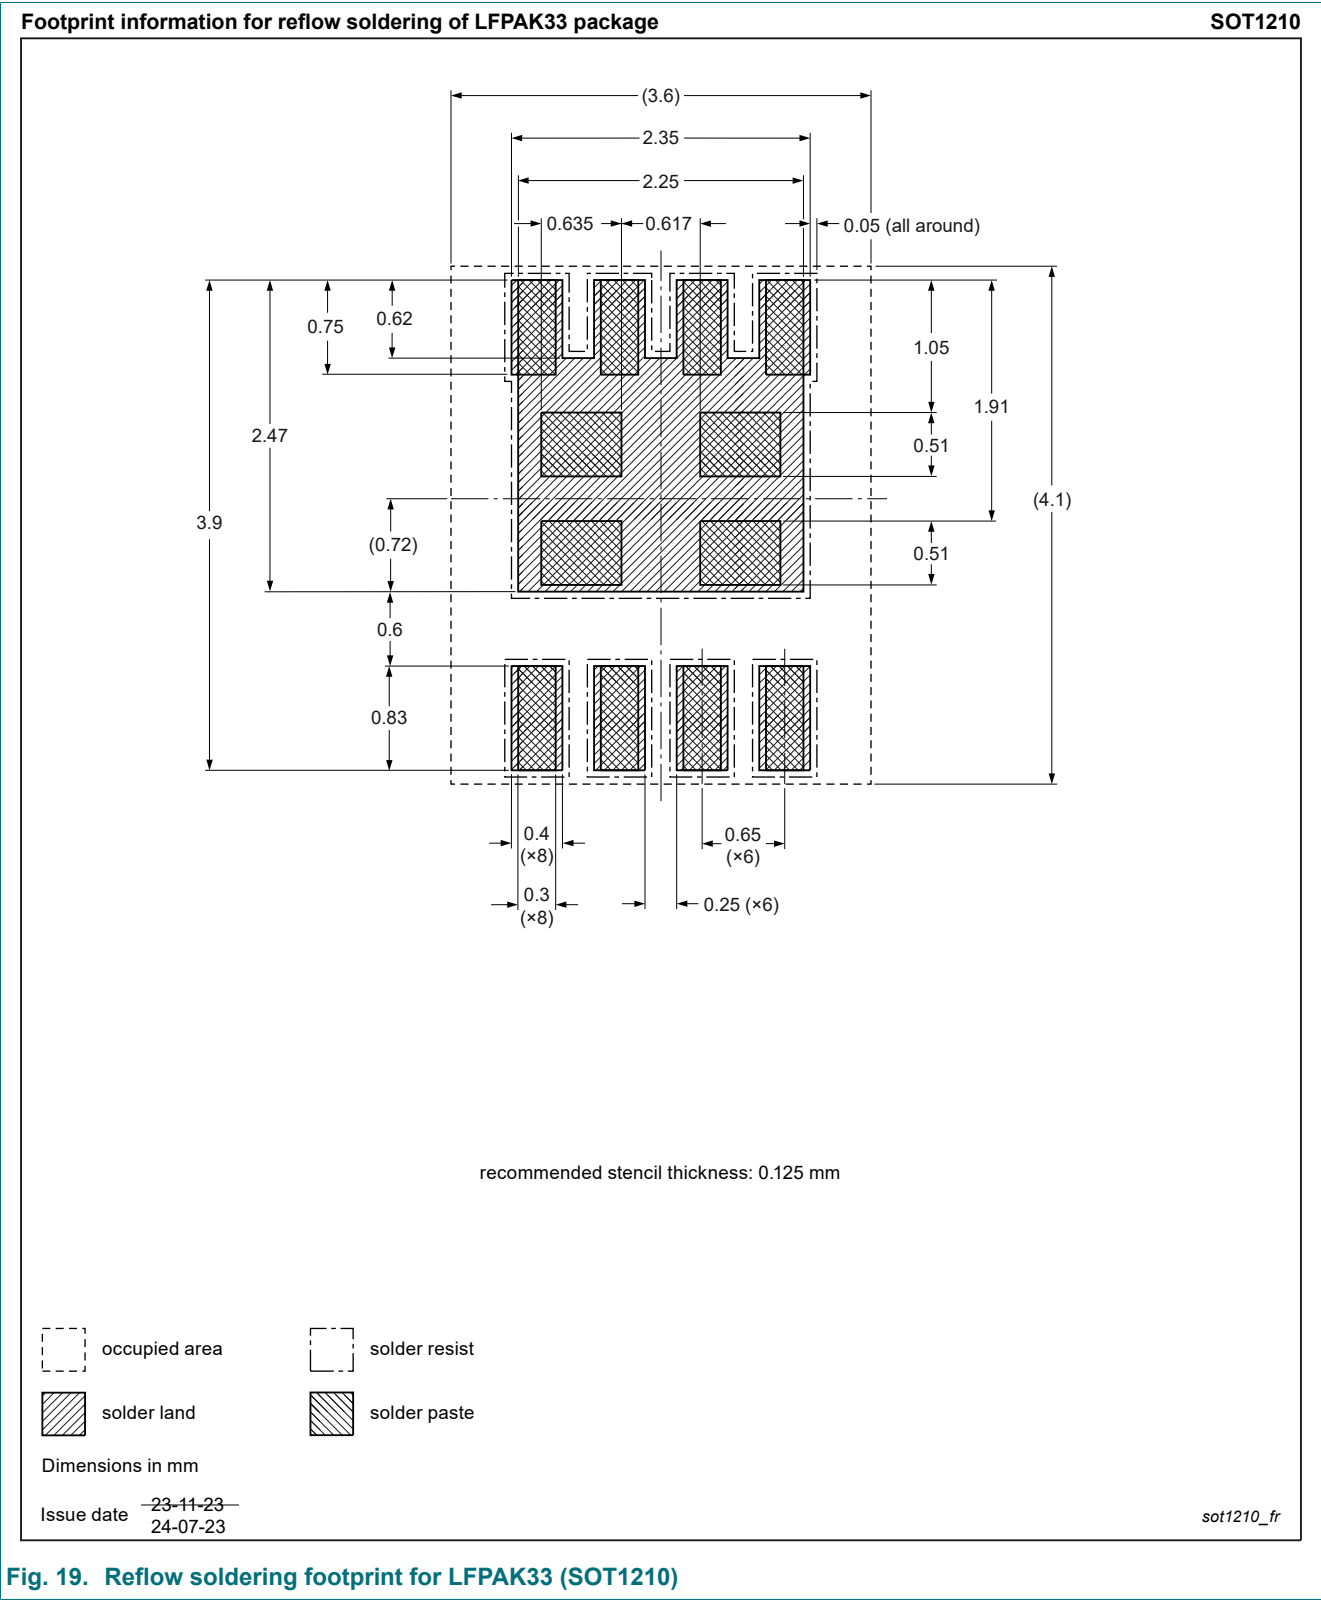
Reflow soldering footprint for LPAK33 (SOT1210)
